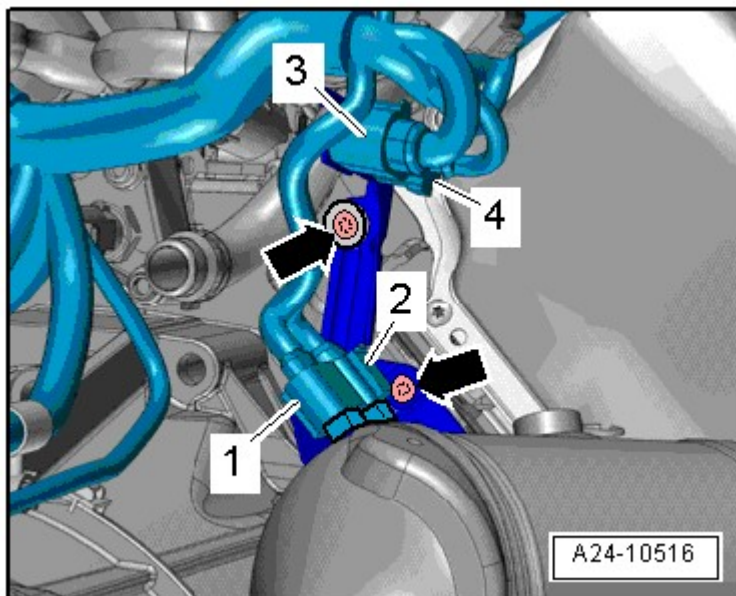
Identifying Bolts -Arrows- And Right Connector Bracket
